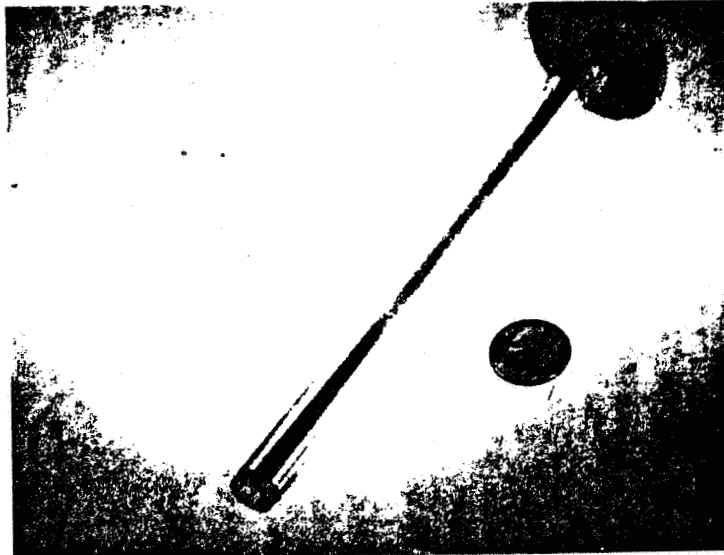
Photograph of an Ultrapulse-welded exhaust valve. A previously-hardened tip ( $R_C$  50) is welded without tempering the tip wear surface.
